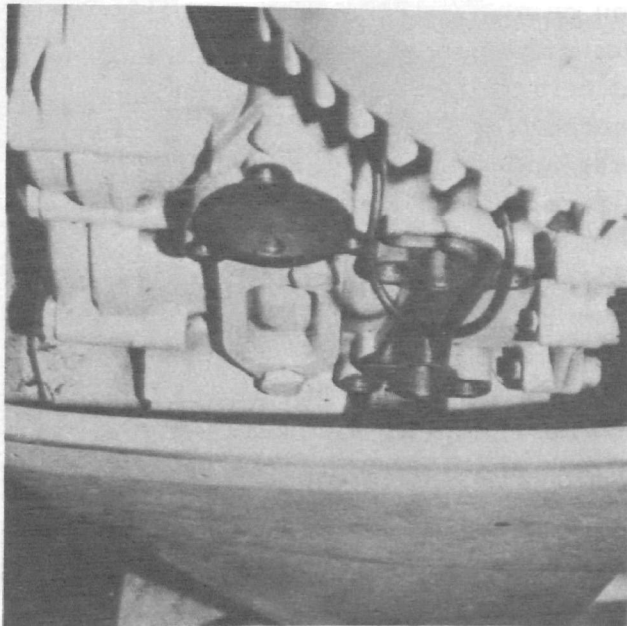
Mounting position for crankcase bleed valve plate on a Chrysler 5 hp outboard
